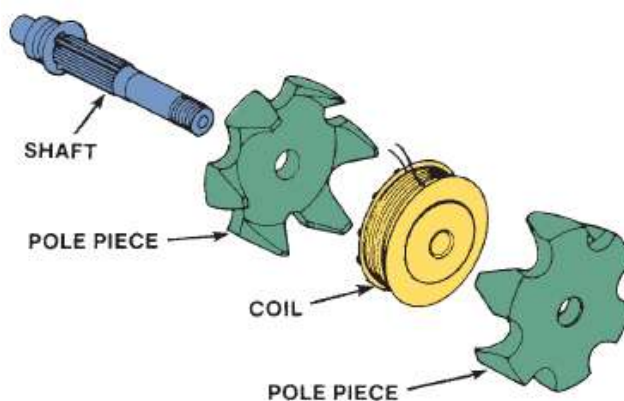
the rotor is made up of a coil, pole pieces, and a shaft.
